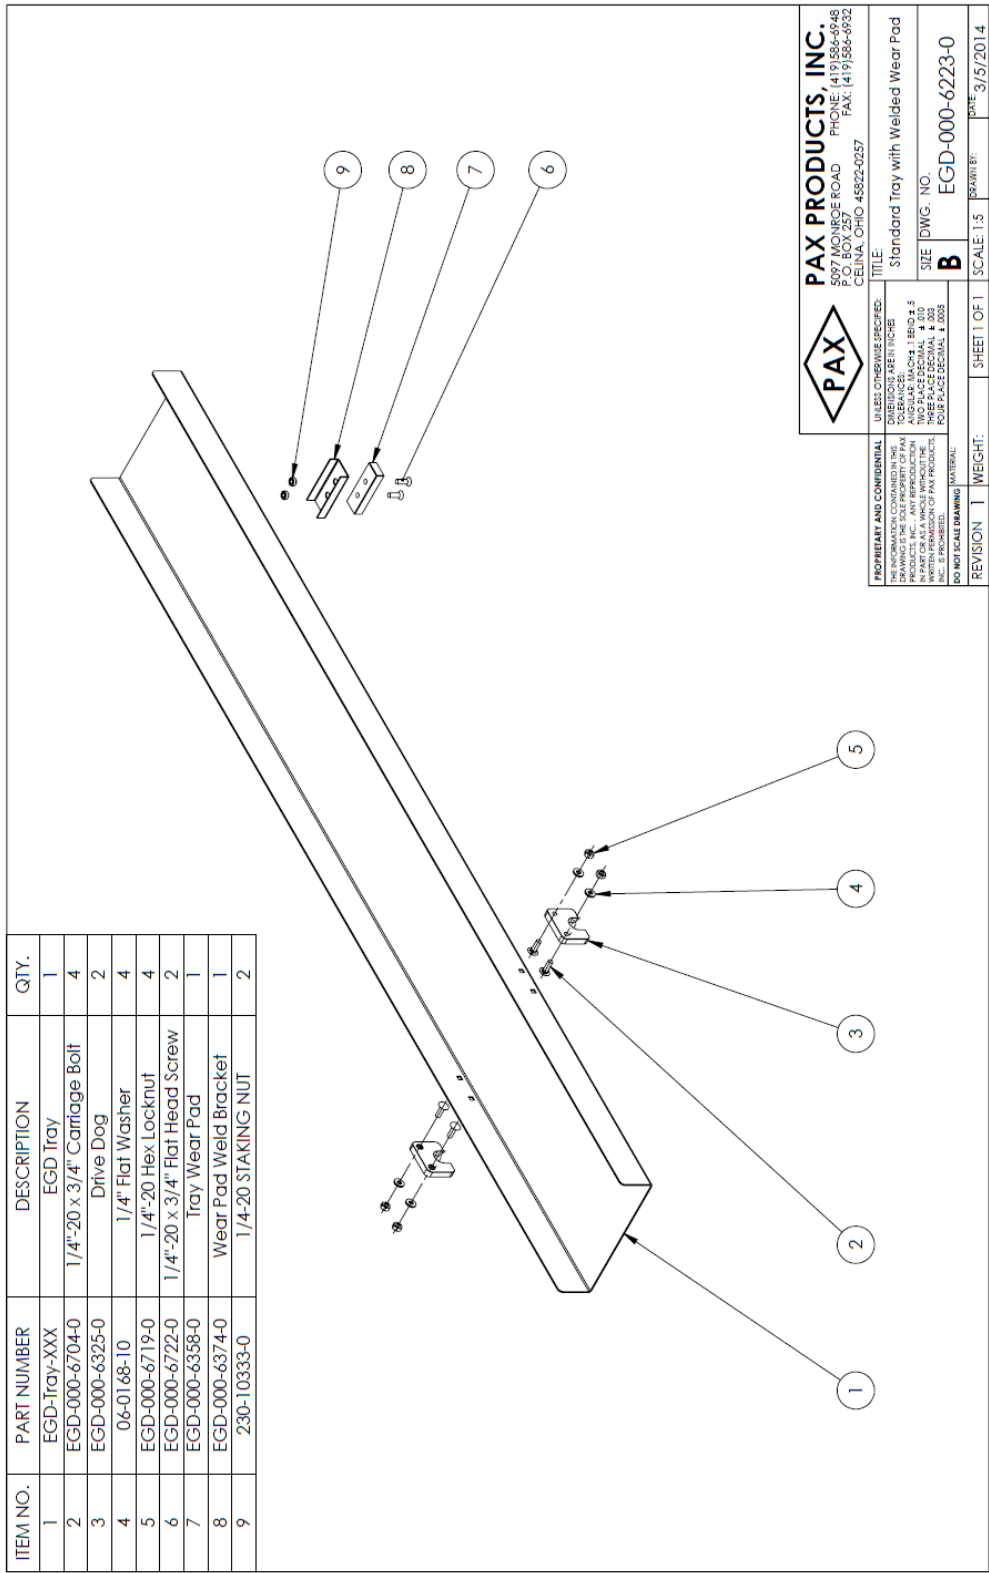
EGD-000-6223-0 STANDARD TRAY WITH WELDED WEAR PAD
